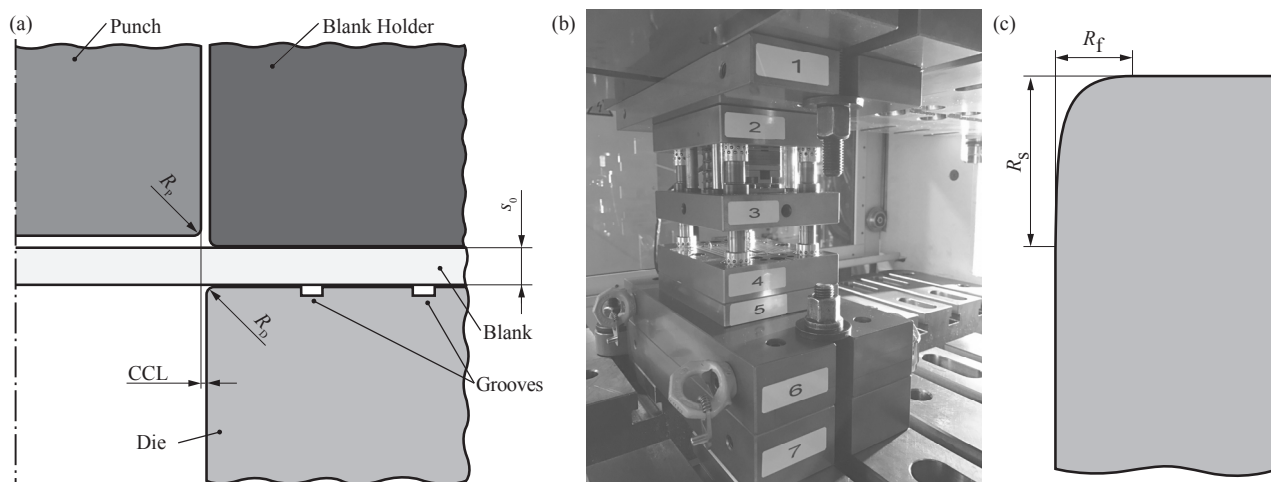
(a), Punching tool sketch; (b), Punching tool inside the mechanical stamping press; (c), Cutting edge chamfer [20]
